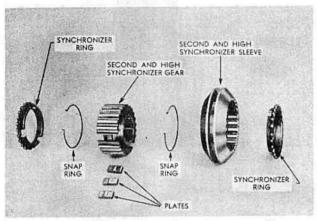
Parts of the Synchronizer Gear and Sleeve Assembly
